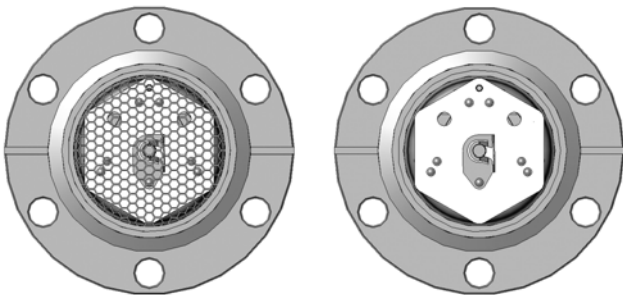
MS Gauge Components - Viewed from the Port End of the Gauge
